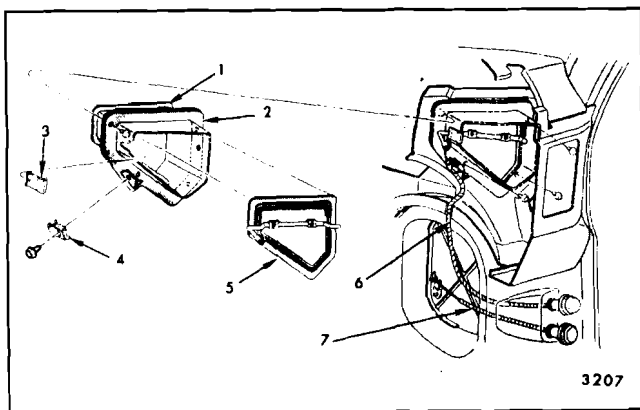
Shroud Center Duct Upper Air Outlet and Door - "B & C" Styles
